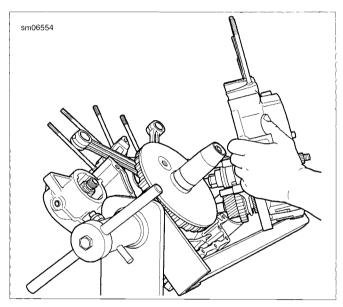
Assembling Crankcases with Crankshaft Guide Tool (Part No. HD-42326-B)
